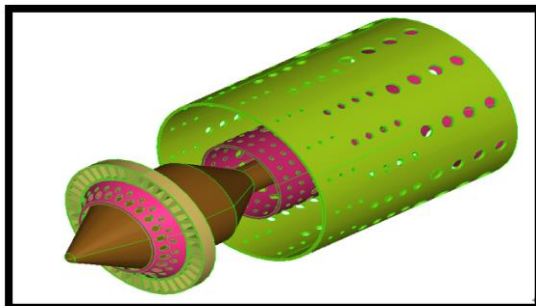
CAD Detail – Assembly of Micro Gas Turbine Combustor
